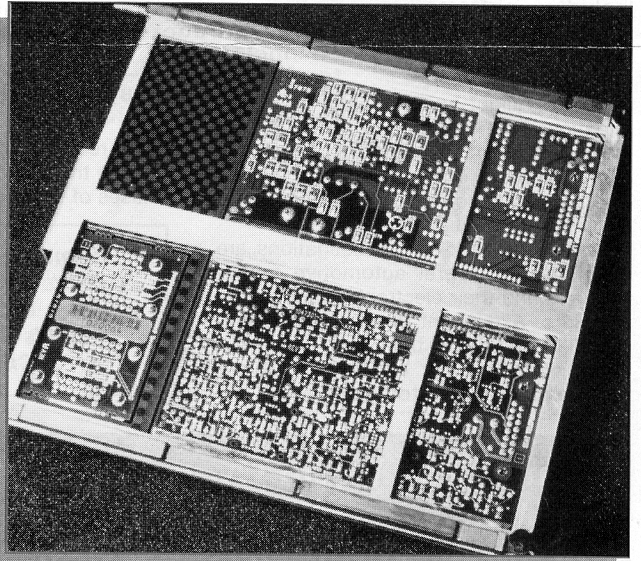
Illustration of a single card with expansion clamp attached prior to loading into chamber fixture.
